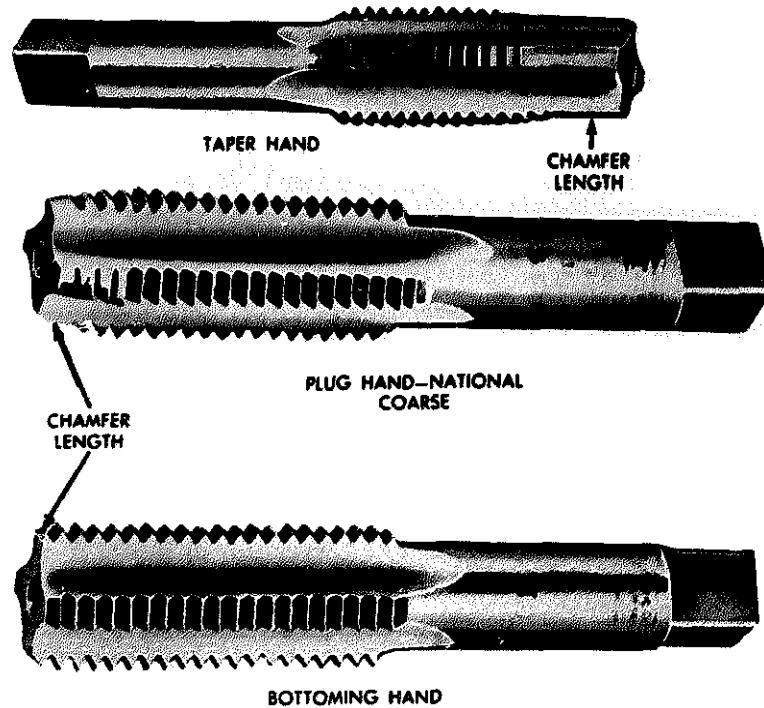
Taps. The taper tap is used for starting the threading of holes. The plug tap is designed for use after the taper tap is used. The bottoming tap is used to thread the bottom of a blind hole.
